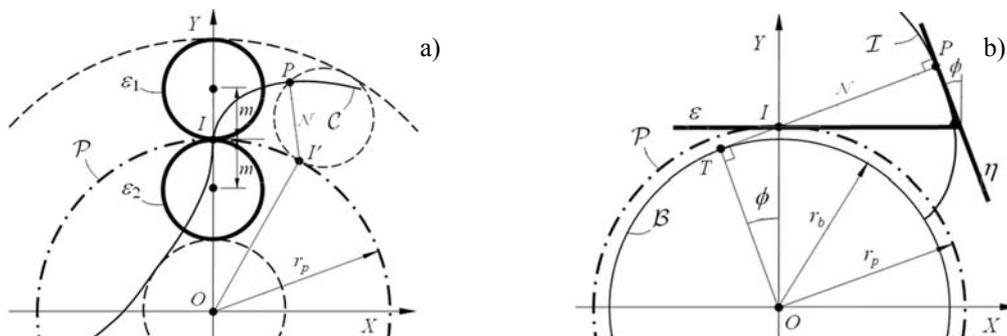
Application of the Reuleaux principle: a) cycloidal gears; b) involute gears.
